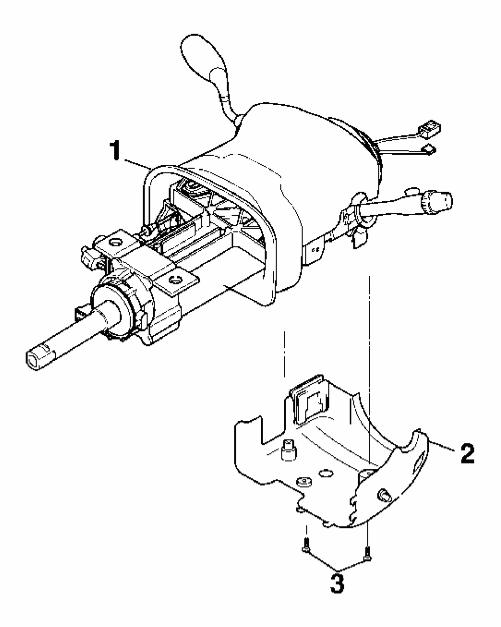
View Of Lower Steering Column Trim Cover & Screws Courtesy of GENERAL MOTORS CORP.
